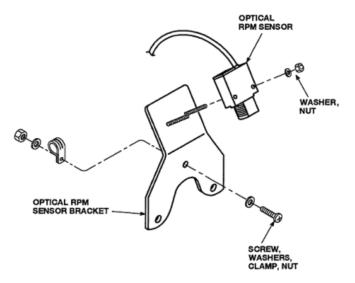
Engine Output Shaft Balance Optical RPM Sensor and Bracket Assembly
